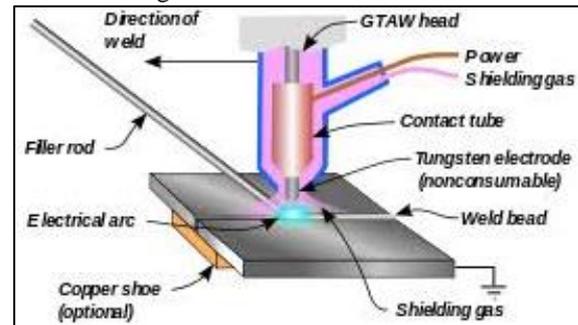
Tungsten inert gas Welding (TIG)
